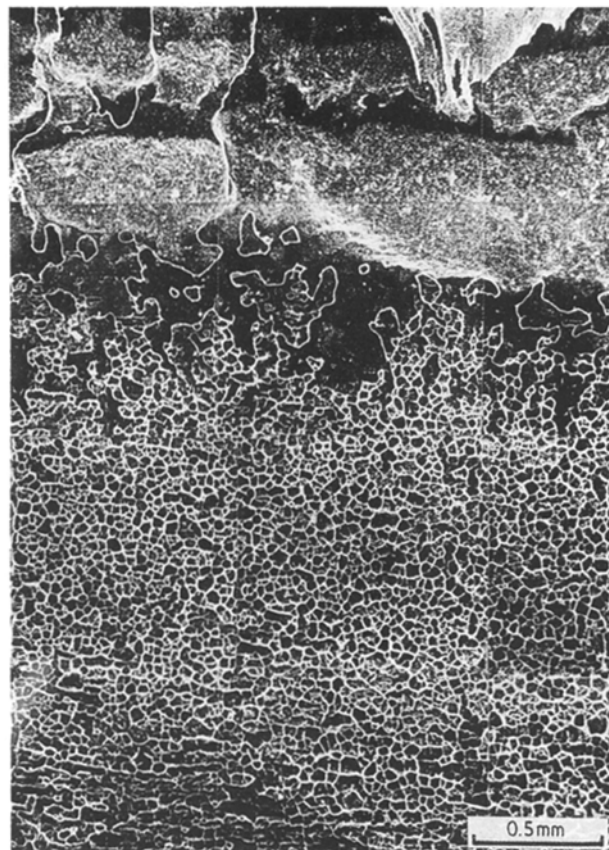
SEM fractograph of the joint brazed using Al-0.06 wt % Si filler metal.
